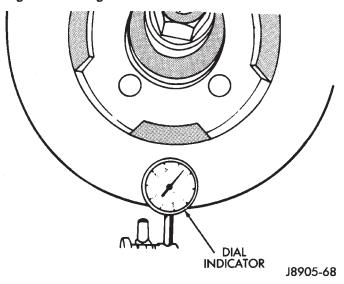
Typical Method Of Checking Rotor Lateral Runout
